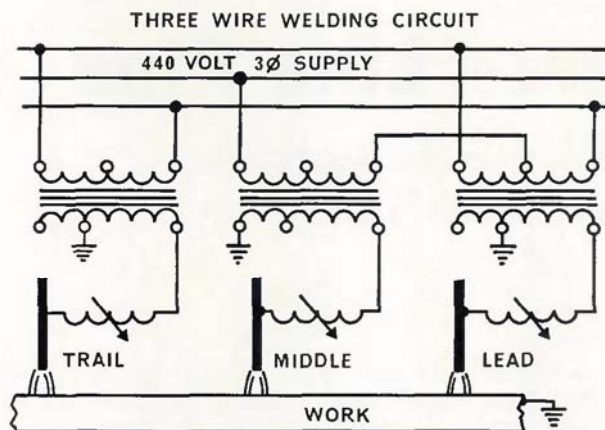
Wiring schematic of a-c welding transformers used for three wire welding
